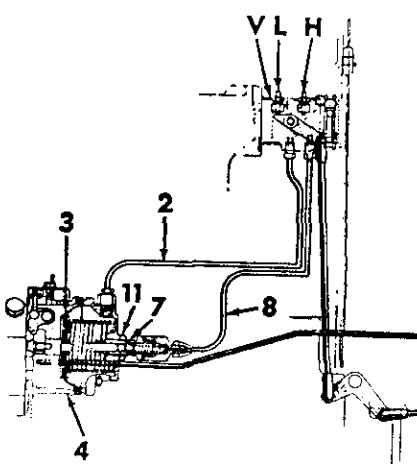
Schematic view showing governor assembly, venturi and the connecting pipes used on early B-275 tractors.
